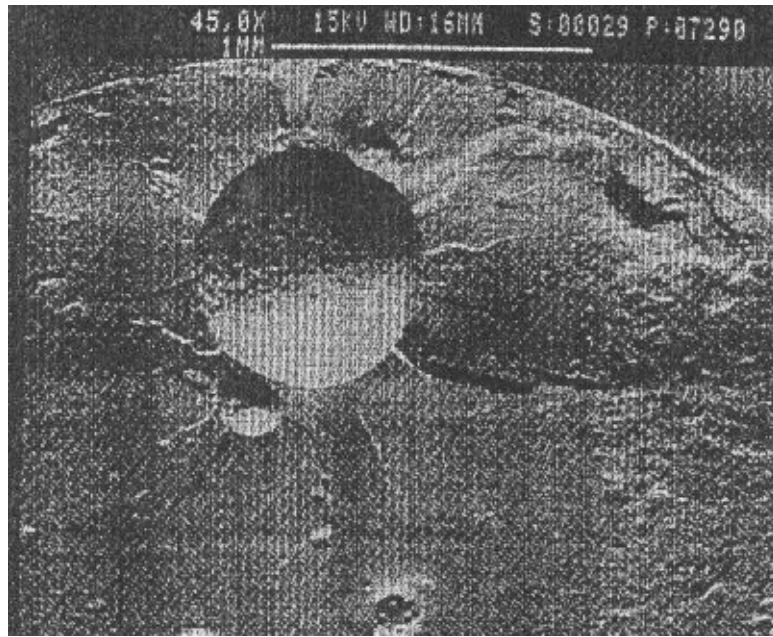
Fracture surface showing large pore and smaller adjacent pores where cracks have initiated [48].
